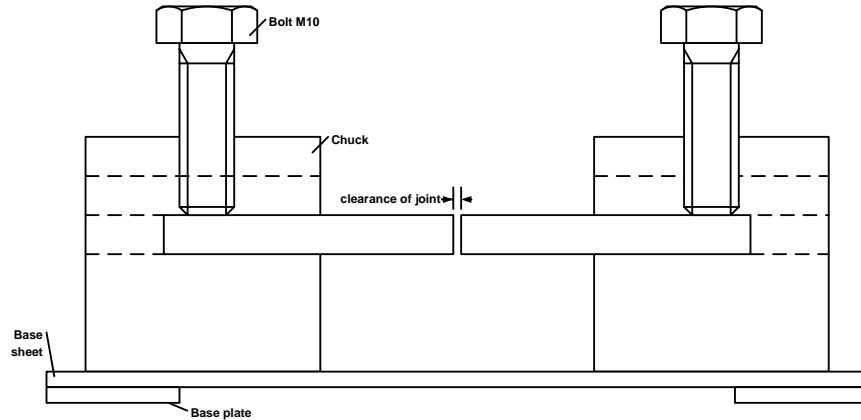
Design of fixture used to change the clearance width of brazed specimens.
